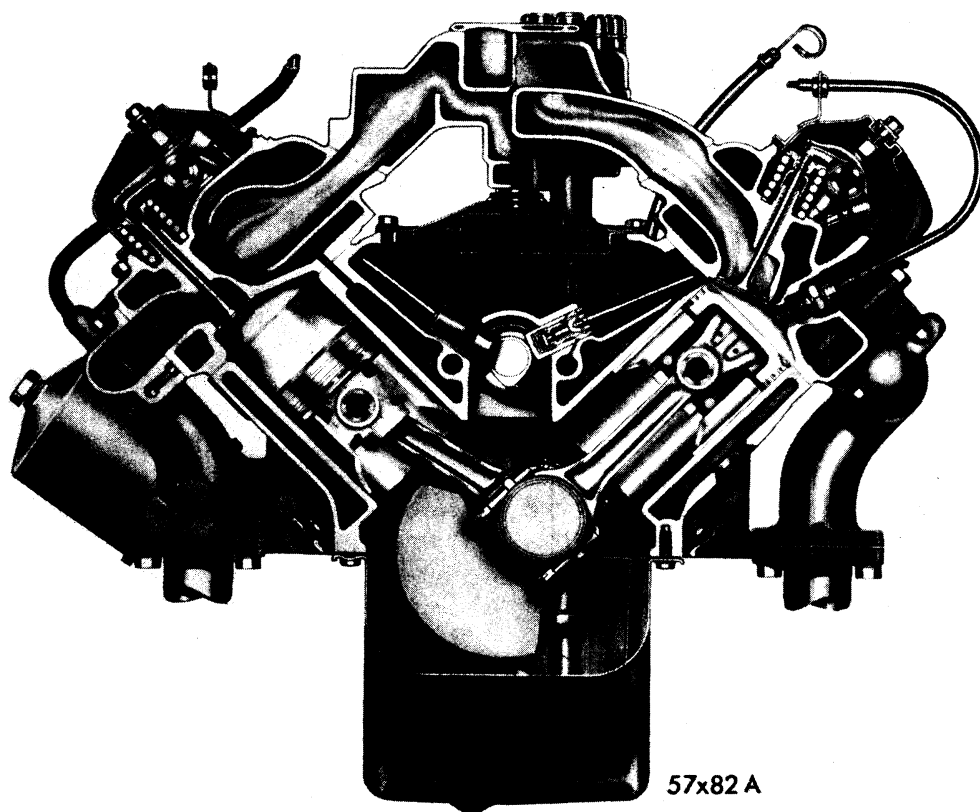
SpitFire V-8 Engine (End Sectional View)
